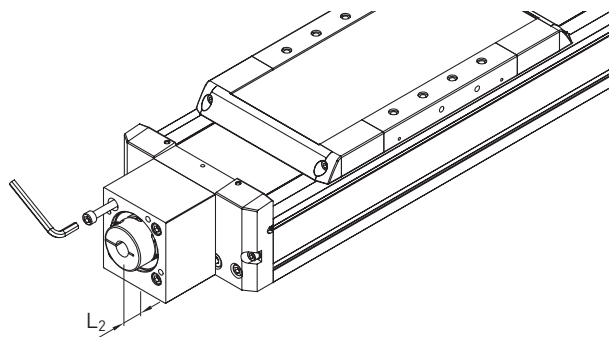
Mounting the clamping hub and the coupling housing KB on the linear table HT-S
